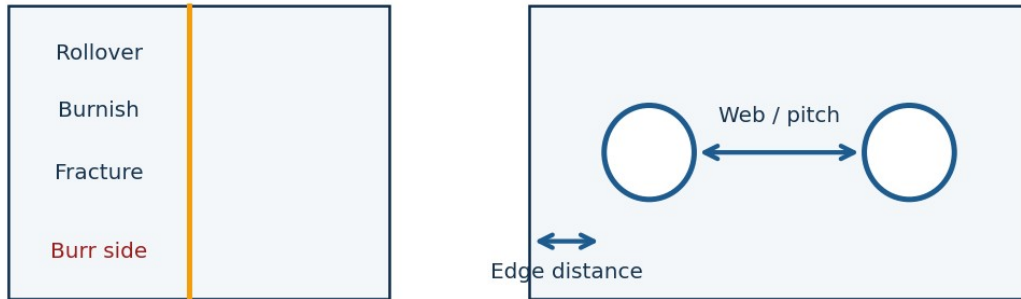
A punched edge normally contains rollover, burnish, fracture and a burr on the die side.
